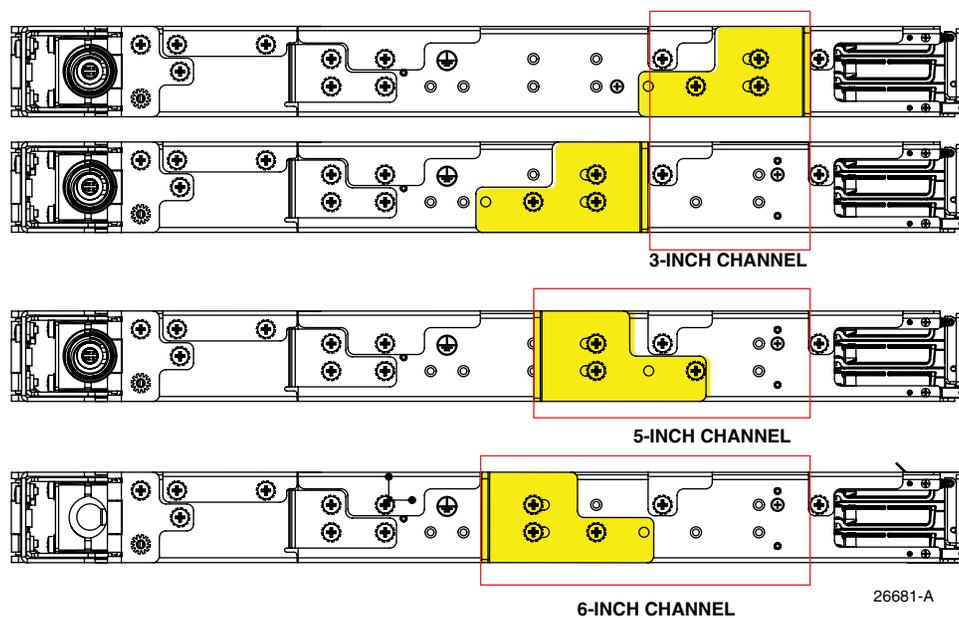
Mounting Positions on 3-Inch, 5-Inch, and 6-Inch Channel Racks
